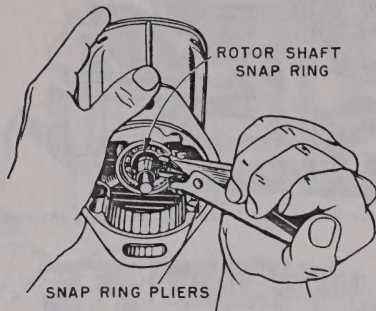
Replacing Rotor Drive End Shaft Snap Ring
